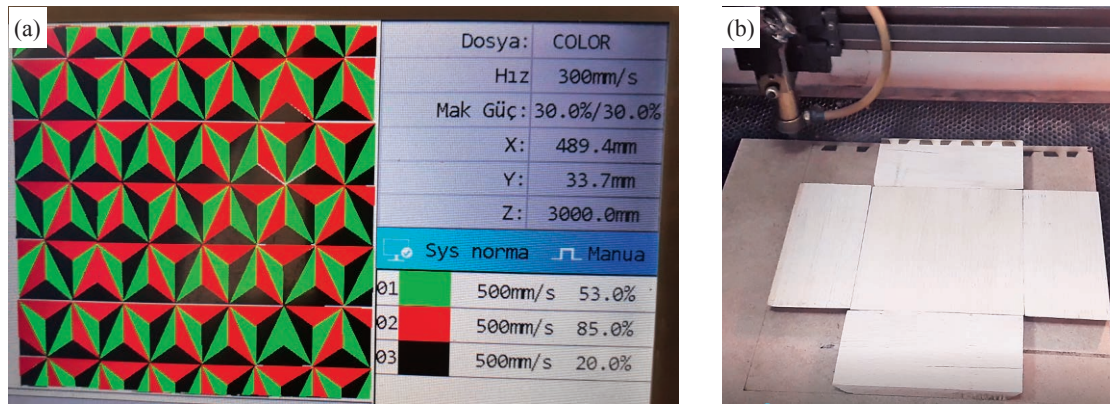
(a) CNC laser product manufacturing design, (b) CAM manufacturing initial stage
